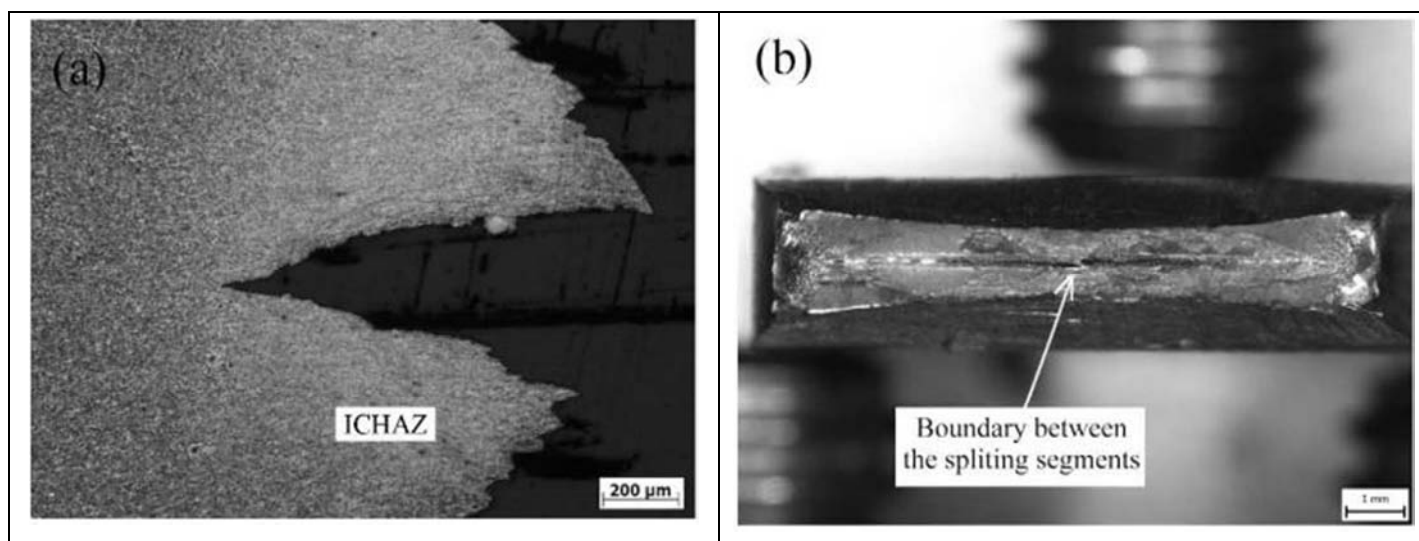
Fracture profile (a) and macro fracture surface (b) of tensile test specimen after rupture
